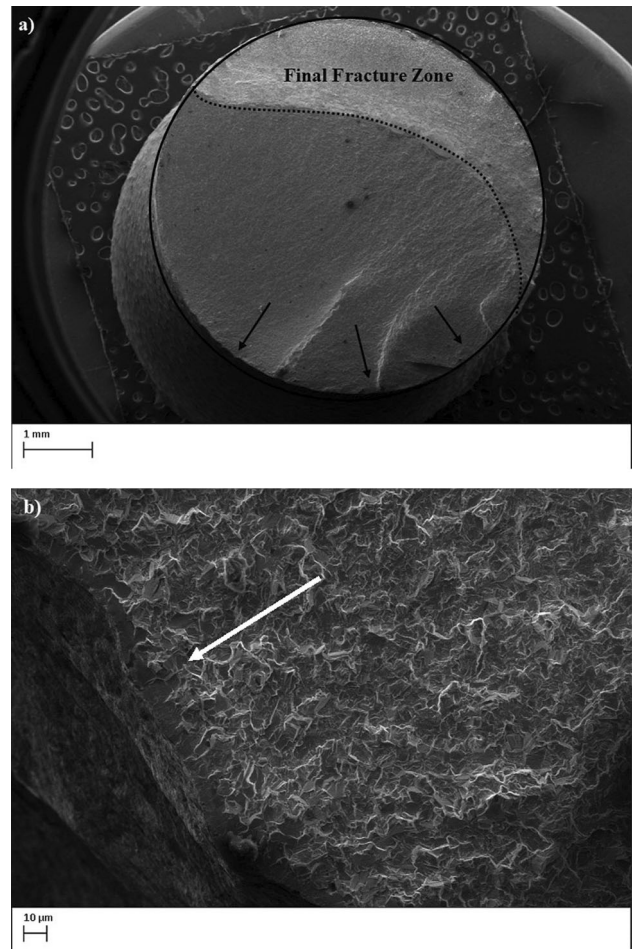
Ti-6Al-4V alloy fatigue fracture in the SP + PIII 500 condition, 875 MPa: (a) fracture overview (mag. = 30X), (b) fracture origin (nucleation site, mag. = 1000X)
